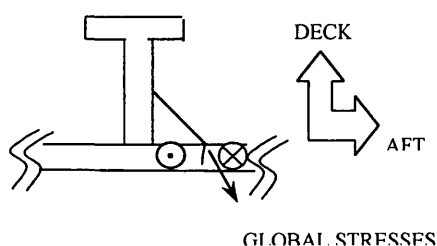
Global stresses affecting crack 3 at the upper hopper plate and side bracket connection.
